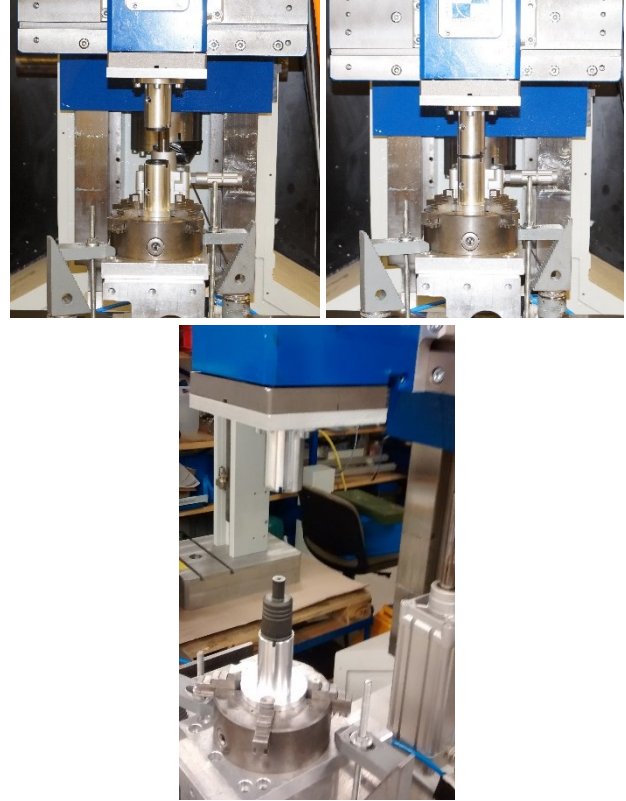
Welding module before, during, and after joining of PA 6.6 specimen.
